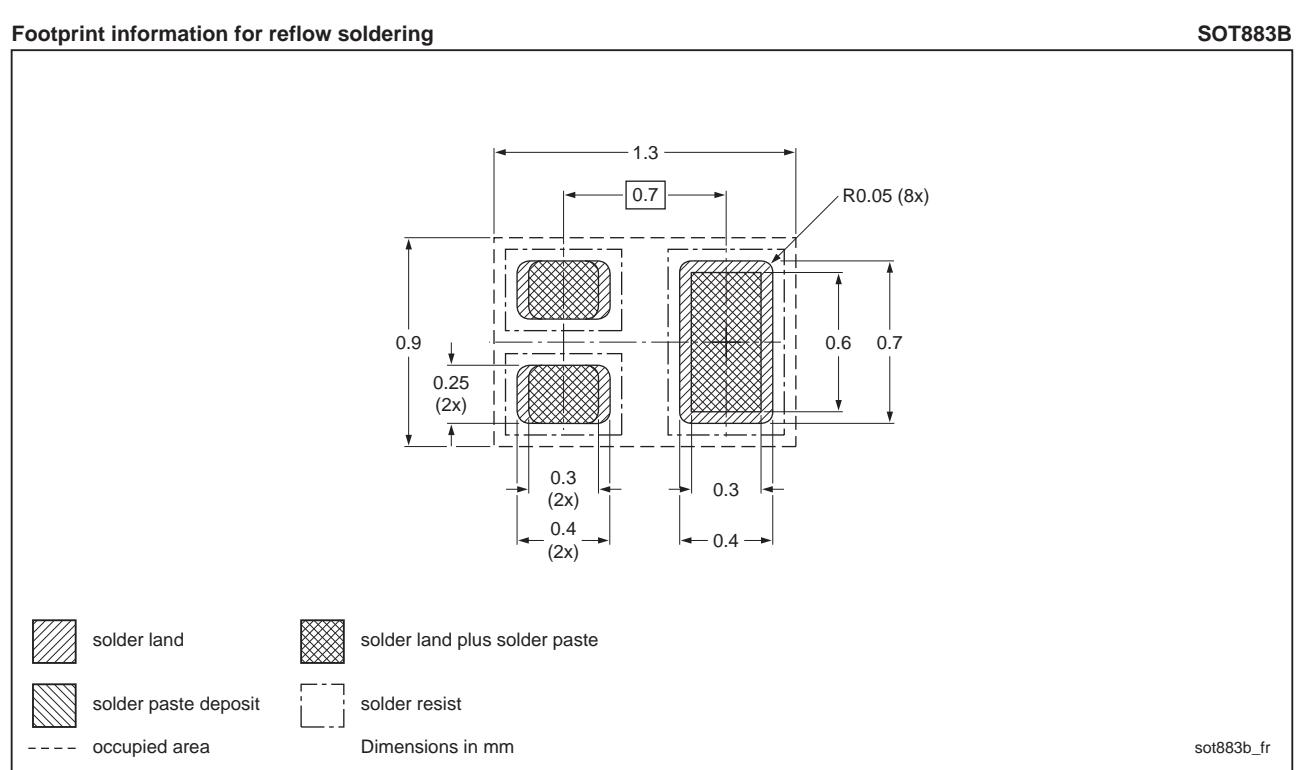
Reflow soldering footprint for SOT883B (DFN1006B-3)
